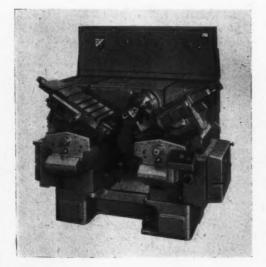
Frontor 40 single-spindle chucking automatic for turning up to 19 16 in. diameter
